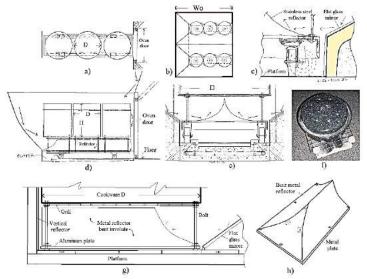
Thru-Reflector-Wall (TRW) solar cooker-kitchen large cookware / receiver options rolled in-out: a-b) plan view of three large cookware/receivers per slot; c) detail of tray wheel; d) N-S section drawing of three large cookware/receivers; e) section drawing of ridged involute stainless steel reflector on cart under cookware/receiver; f) mock-up model of cookpot
